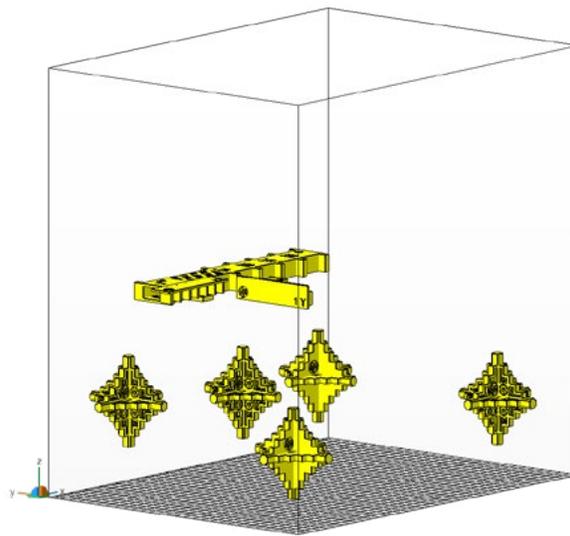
Dimensional test parts in half bucket part property test build. Mechanical and look and feel parts are hidden to highlight location of dimensional parts.
